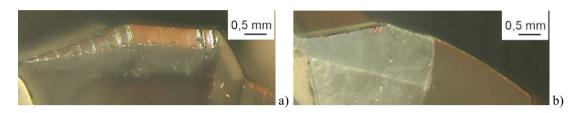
Frontal view of the tools after 285 holes; (a) Step drill bit; (b) Double point angle drill bit.
